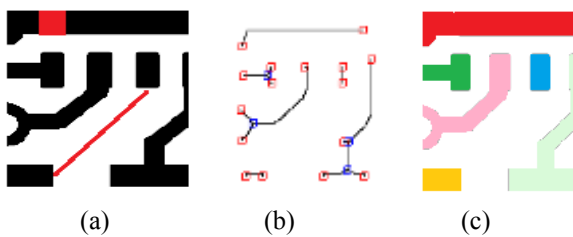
PCB fragment (a) with short and open defects, its skeleton (b), and filled chains (c)
